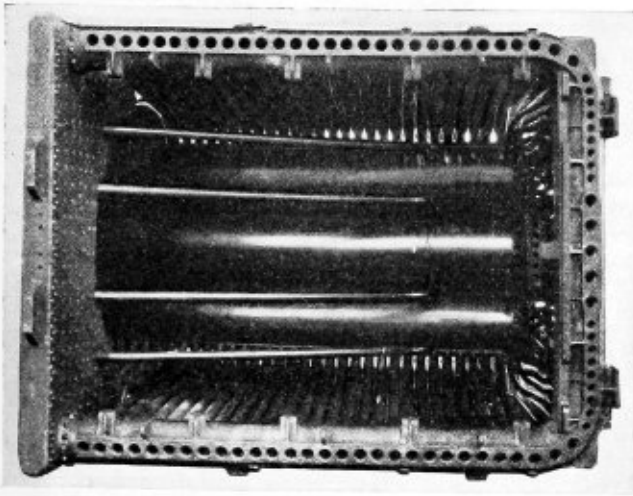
View looking into firebox, showing arch tubes and side vertical tubes
